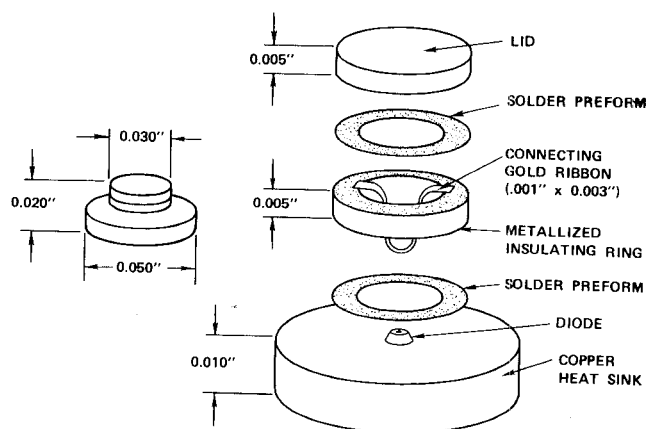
Packaging scheme for sealing the millimeter-wave IMPATT diodes.
